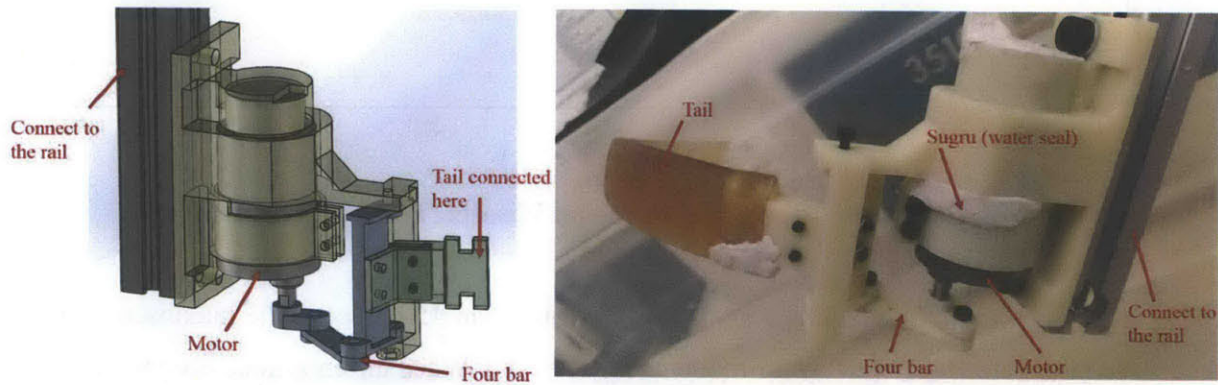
The CAD Model and the Prototype of the Preliminary Design
